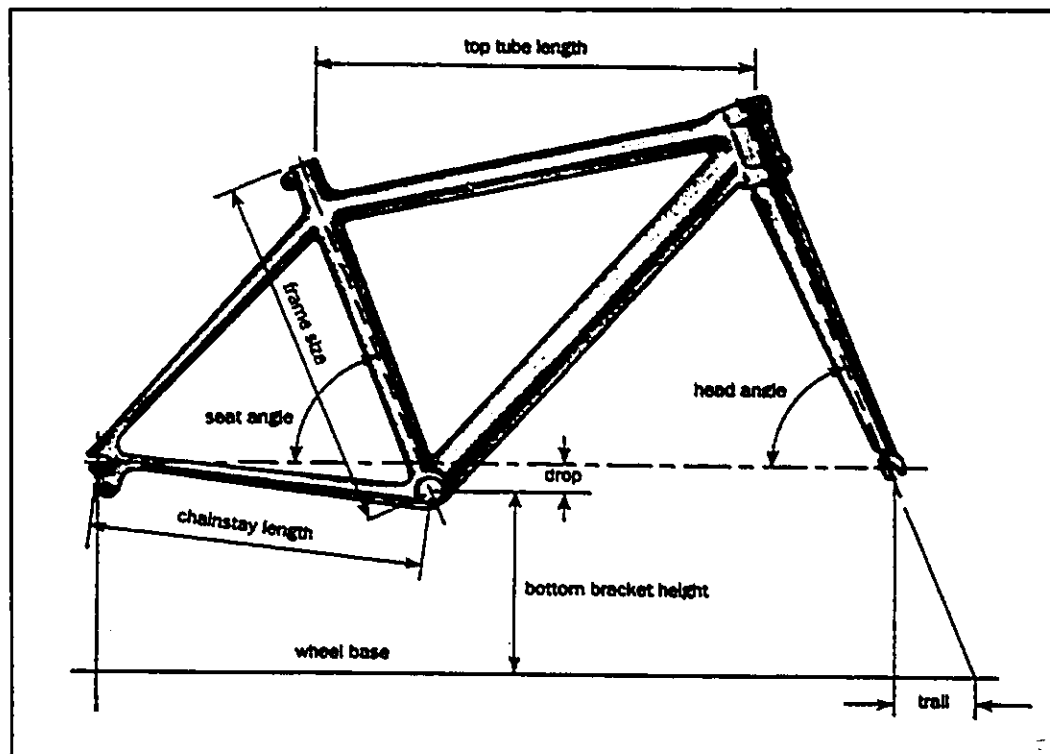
Basic Dimensions of Traditional Frames [10]
